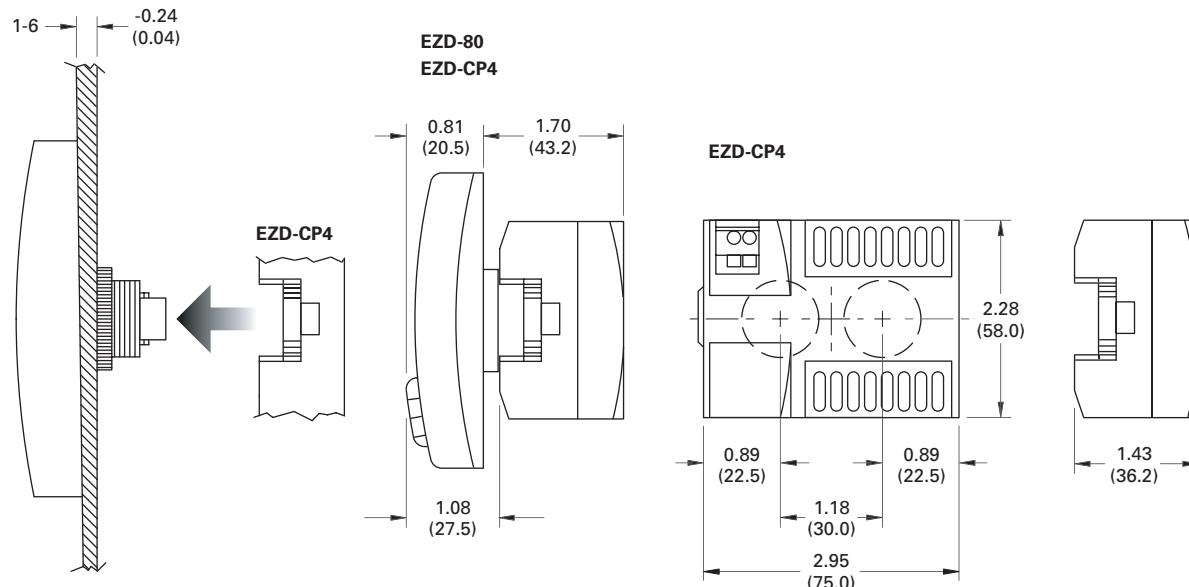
EZD-CP4, EZD-80 and EZD-CP4 Series Combined Dimensions in Inches (mm), Drawing Number MD013013E
